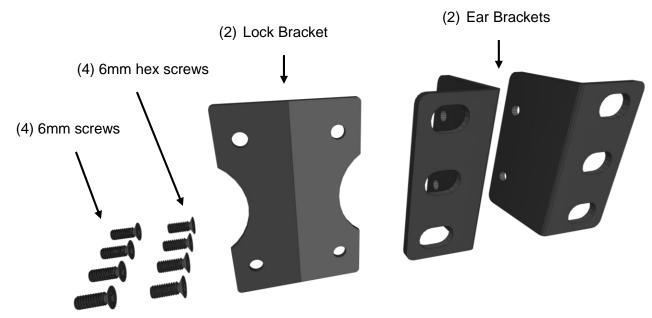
Cbox L3/S3 Rack Mount Kit with Lock Bracket
